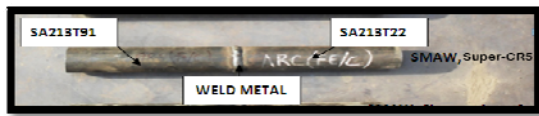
Dissimilar Weldment of T91/T22, SMAW
